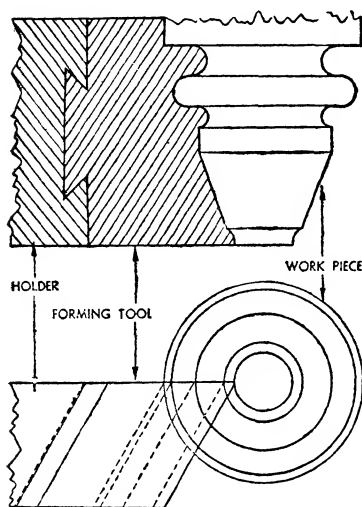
Diagram showing application of a forming tool of the circular type. Note that the shape of the tool is negative to that required in the work.
